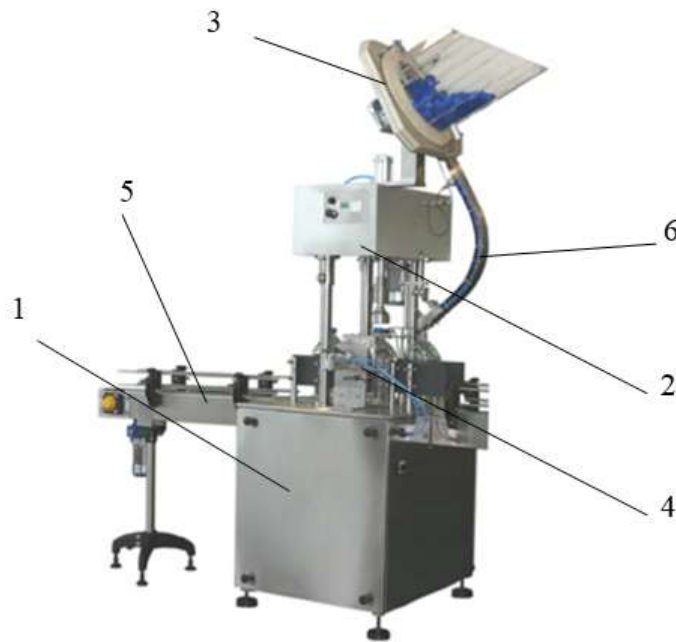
Typical construction of capping machine / Конструкція типового автомата для закупорення пляшок
